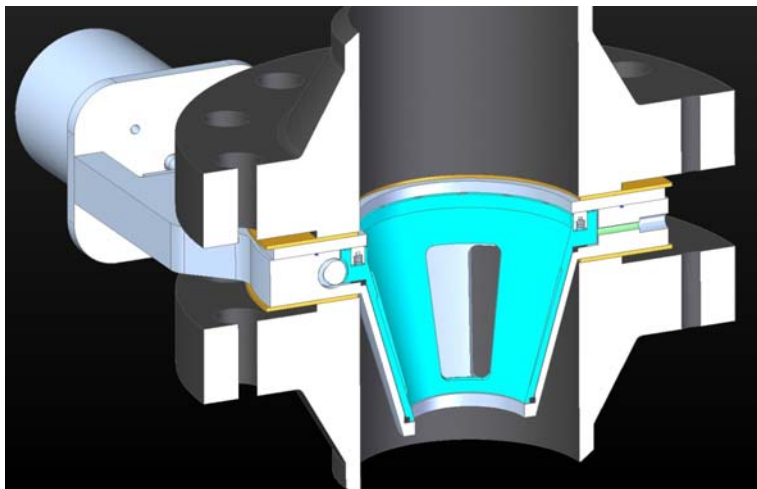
A: Conical DVO showing fixed lower ported plate held between pipe flanges and rotatable upper ported plate.
